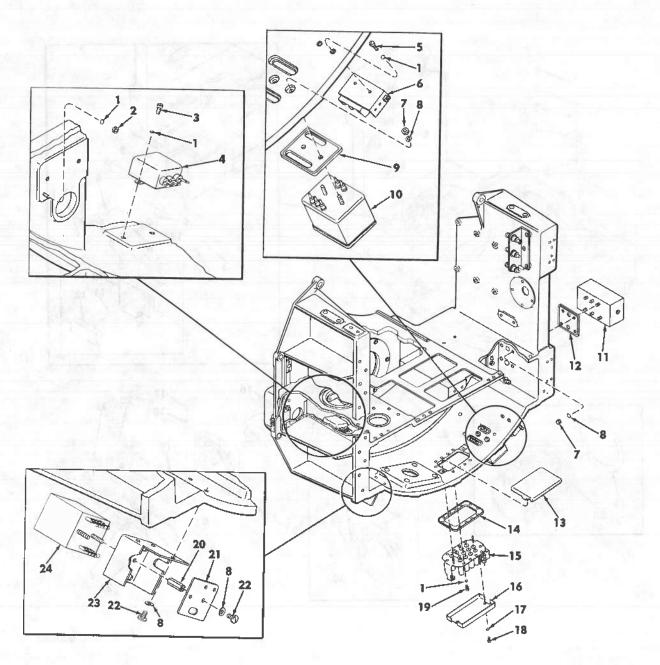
MODULATOR /8172445/-PARTIAL EXPLODED VIEW
